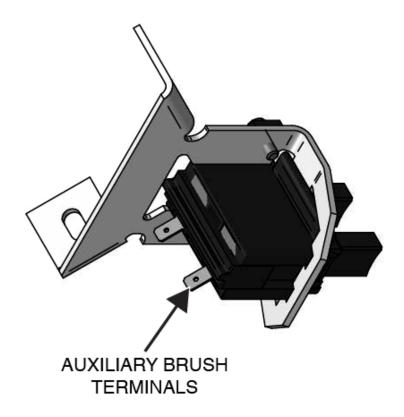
Auxiliary and weld brush holder removal
